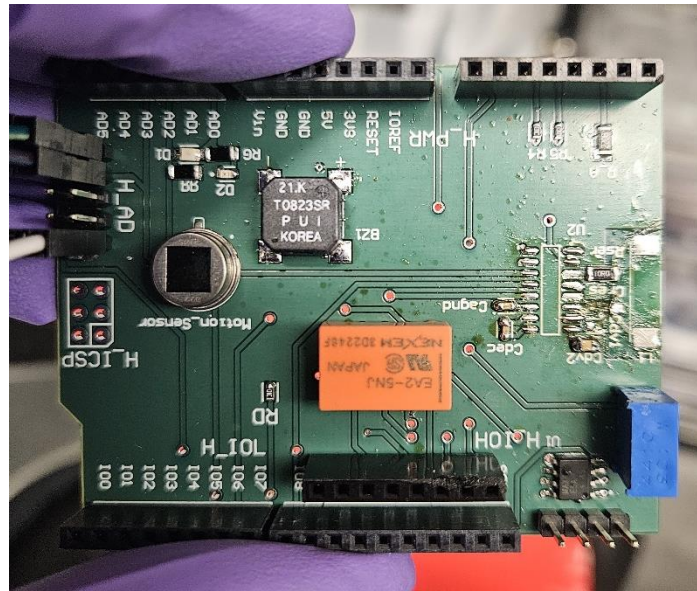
(Top view) Fabricated PCB shield with SMD components soldered on
